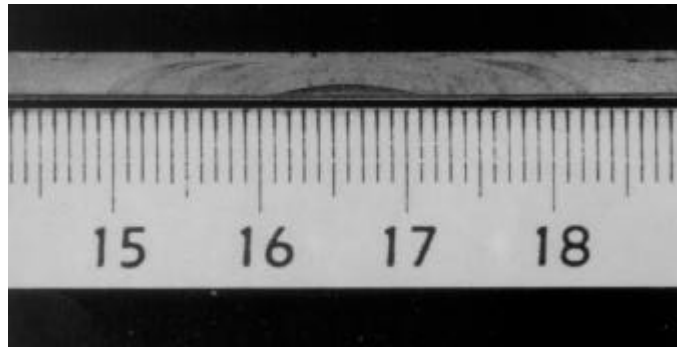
Fracture Surface Appearance of BF-D1 Specimen with Beach Marks (Thickness is 3mm)
